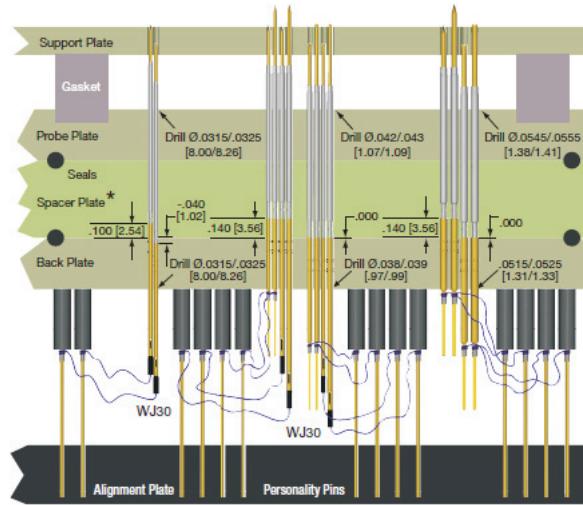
Typical ATE fixture cross section (Ref. 4)
